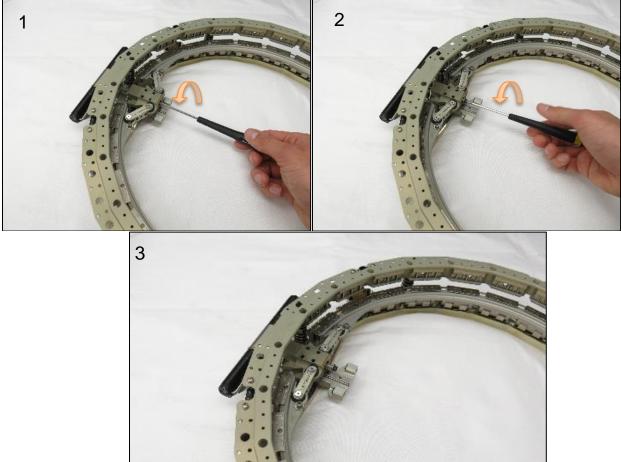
Manually rotating the Ball Screw until the Sliding Tube contacts the Motor Bracket
